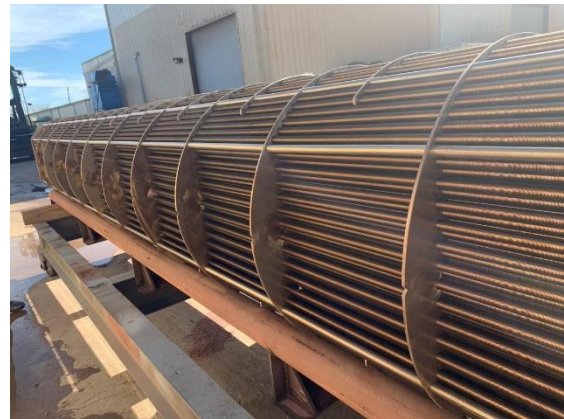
Minimox-treated (shell-side and tube side, 317 SS) heat exchanger tube bundle for
